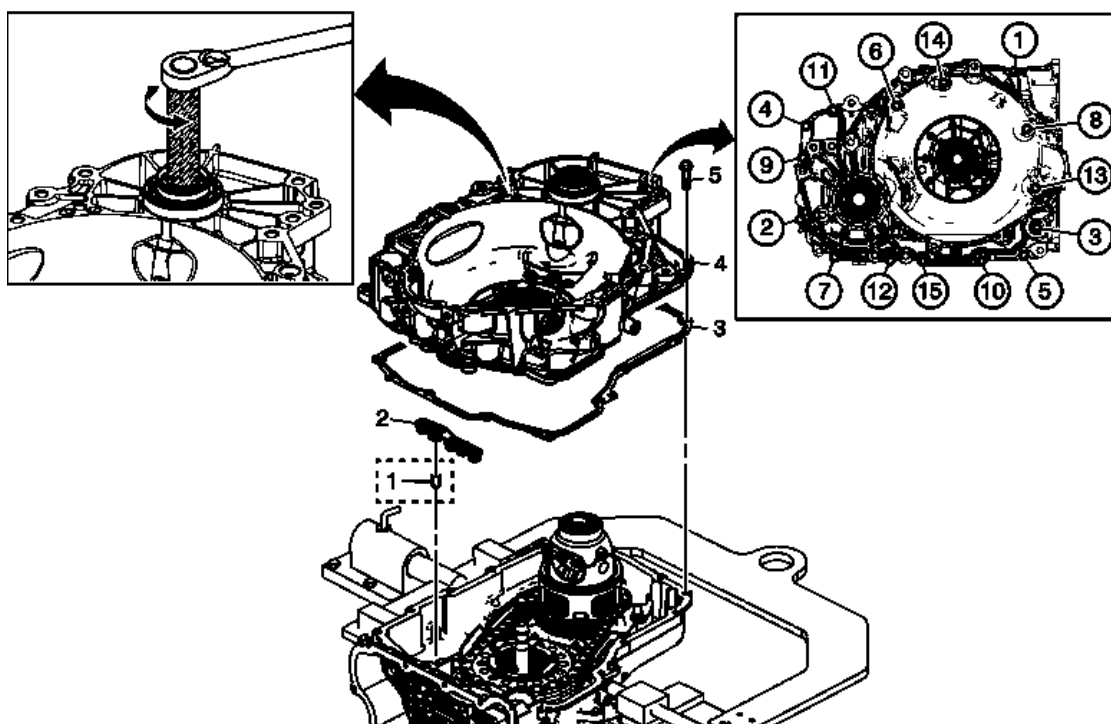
Torque Converter Housing with Fluid Pump Assembly
